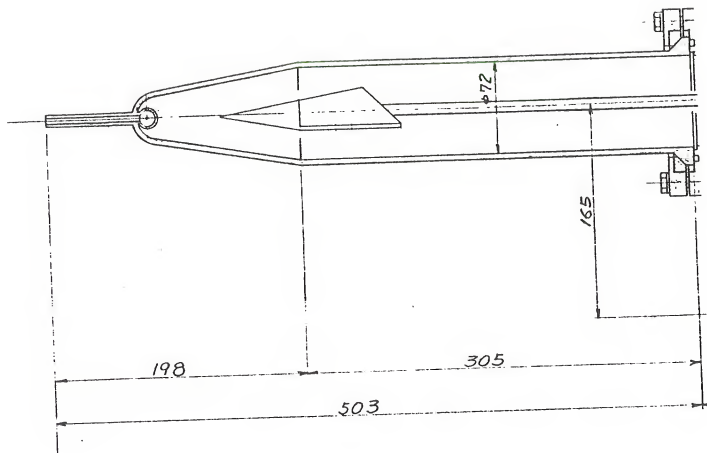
Horizontal reactor with susceptor and deflector assembly.
